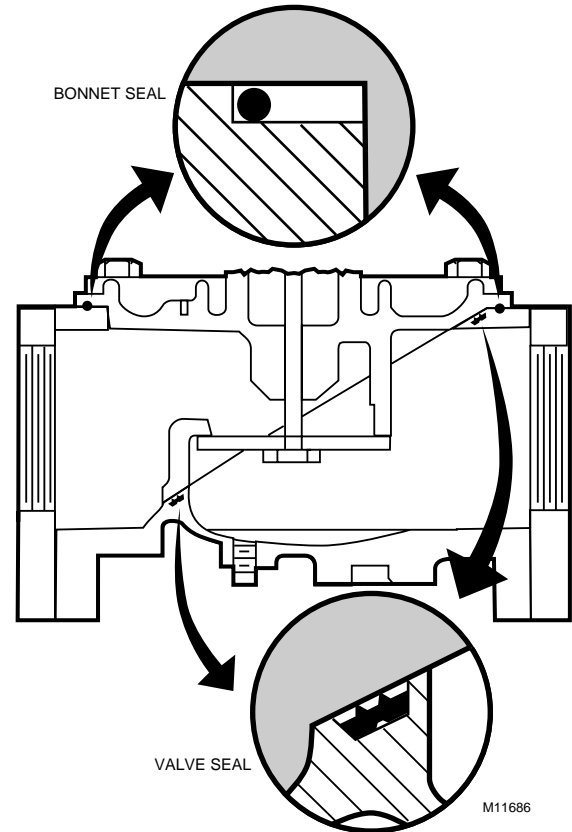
Proper positions of valve and bonnet seals in V5097 Valves.
